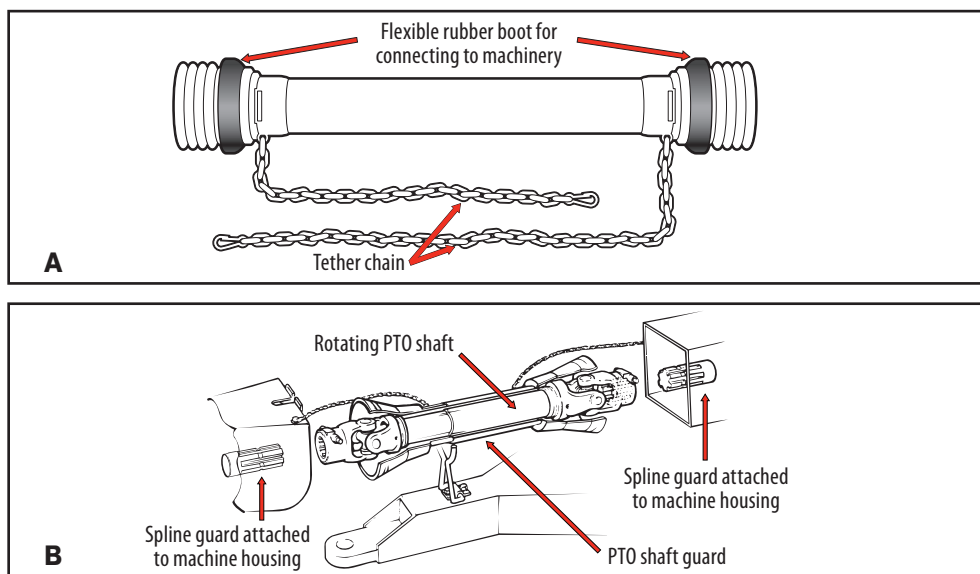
PTO drive shaft guards. (A) With tether chain attached to each end of the guard. (B) Cutaway view of PTO drive shaft and typical guard.
